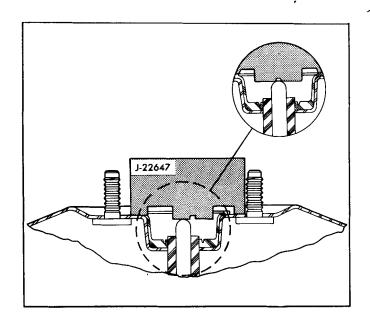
D-22 Gaging Master Cylinder Piston Rod
